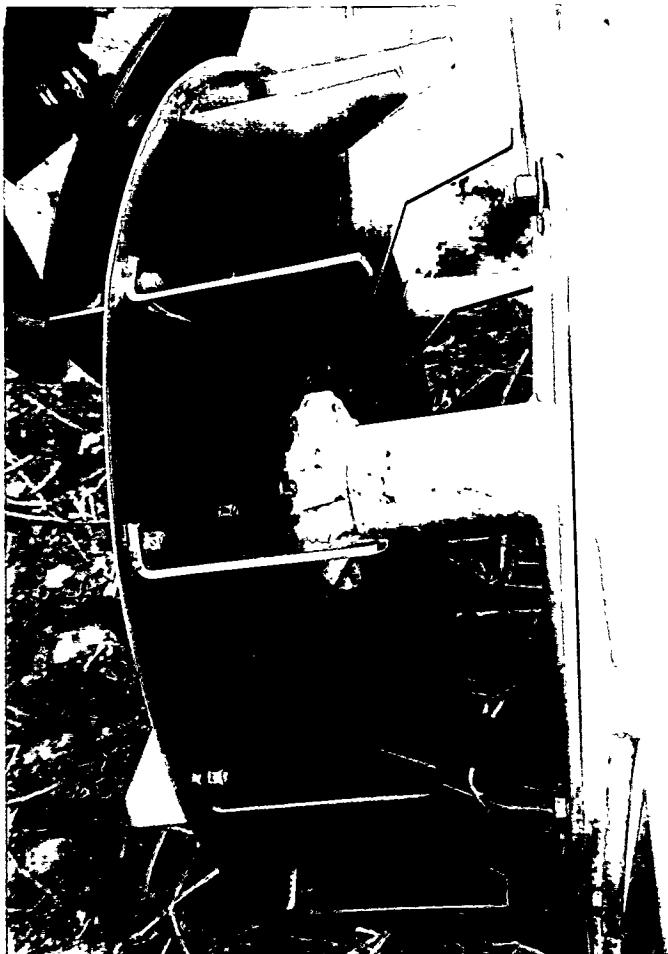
Scraper for the stuffer disk. Slotted holes and carriage bolts make the scraper plate adjustable for both height and angle.
